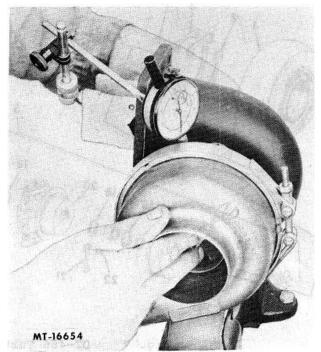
Checking Radiator Shaft Movement With Housing Installed
